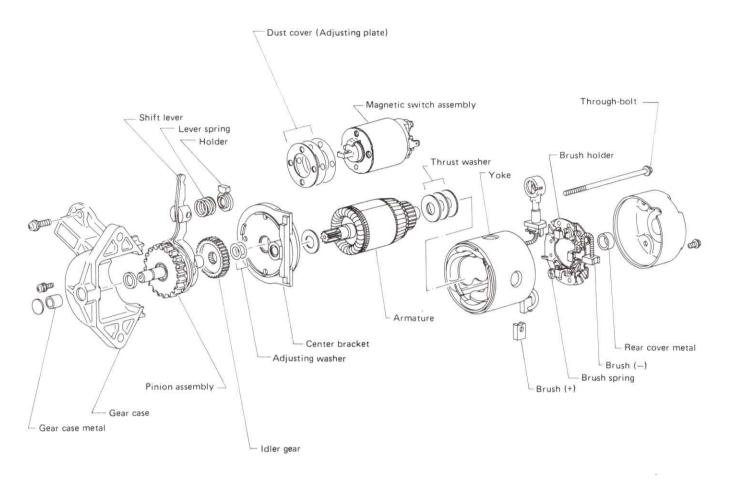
Exploded view of starter motor for automatic transmission (Sec 10)
